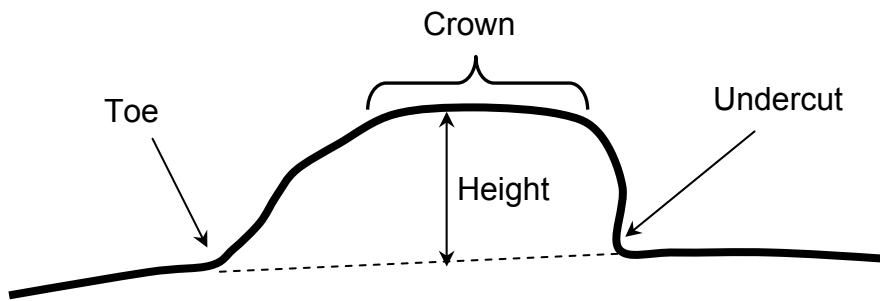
Terminology Used to Describe Weld Geometry
